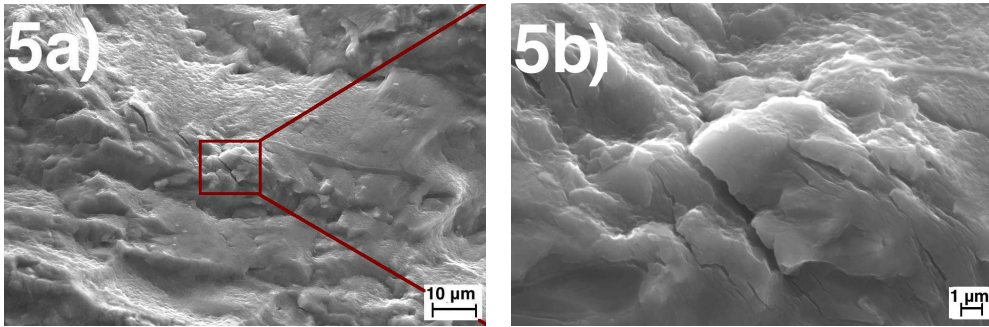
Far from the initiation point, large internal cracks can be found on the fractured surface of AA6082.50-T6 base material.
